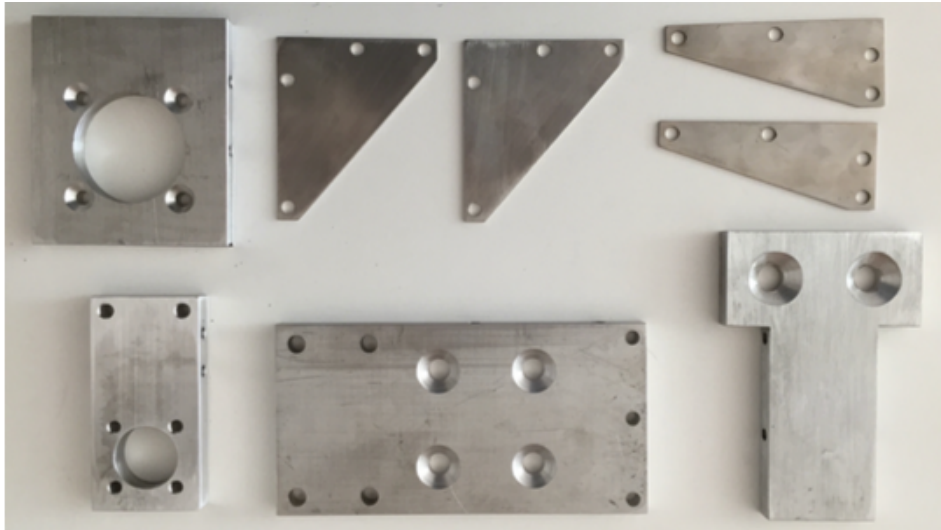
Mechanical parts for *joint 2*, A.A. 6082 and Stainless Steel 304.
